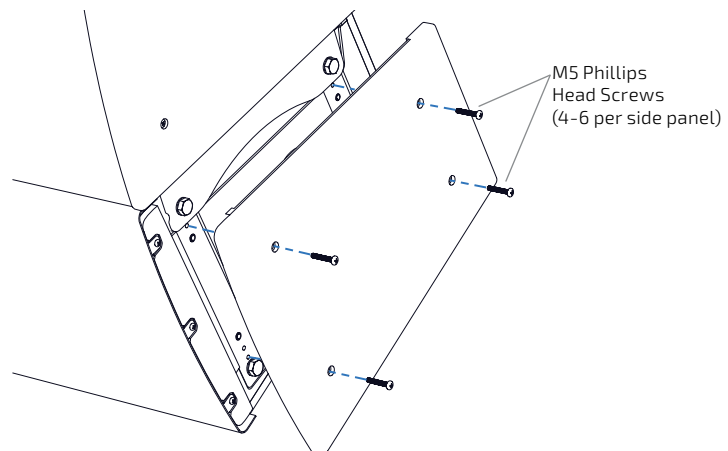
Attach side panels after all bracket connections / hardware has been installed
